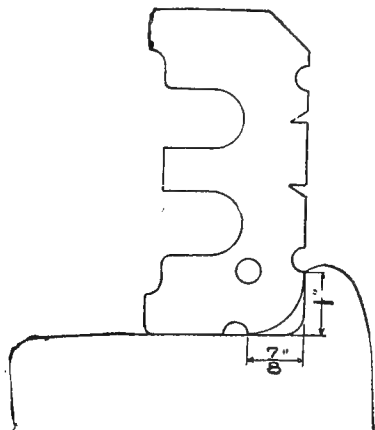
METHOD OF GAGING WORN FLANGES—SEE RULE 74.
